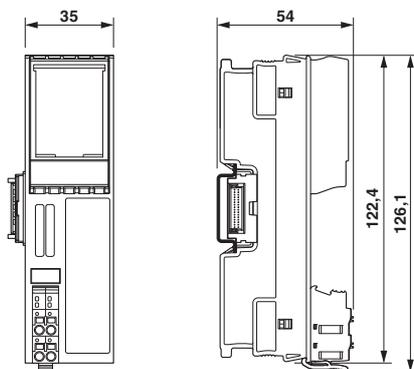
Nominal dimensions of the H housing with one terminal field and short connectors
